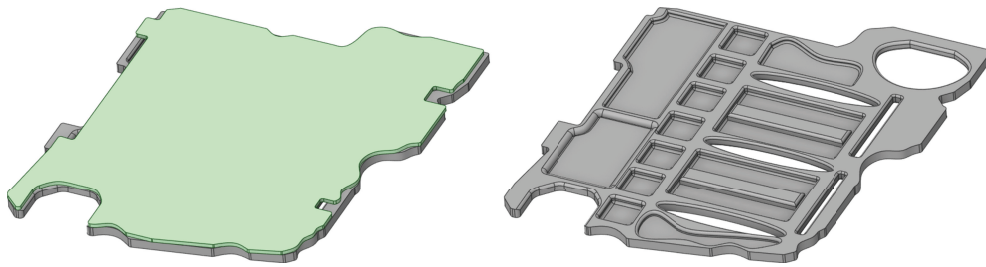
Left: Sub-assembly: Frame and PCB. Right: Frame.
